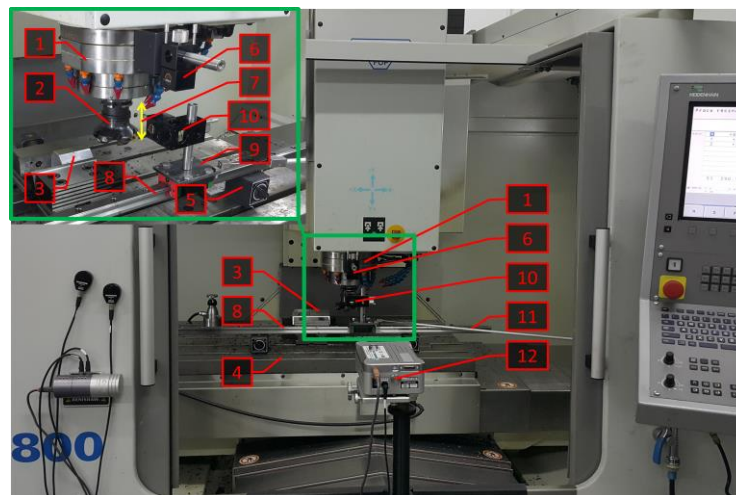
Schematic of device for measuring displacements in the tool-workpiece system: 1- spindle, 2 - milling head, 3 - workpiece, 4 - table, 5 - magnetic base, 6 - linear reflector, 7 - vibrations in the tool-workpiece system, 8 - rail, 9 - block, 10 - linear interferometer, 11 - link, 12- XL 80 laser.
